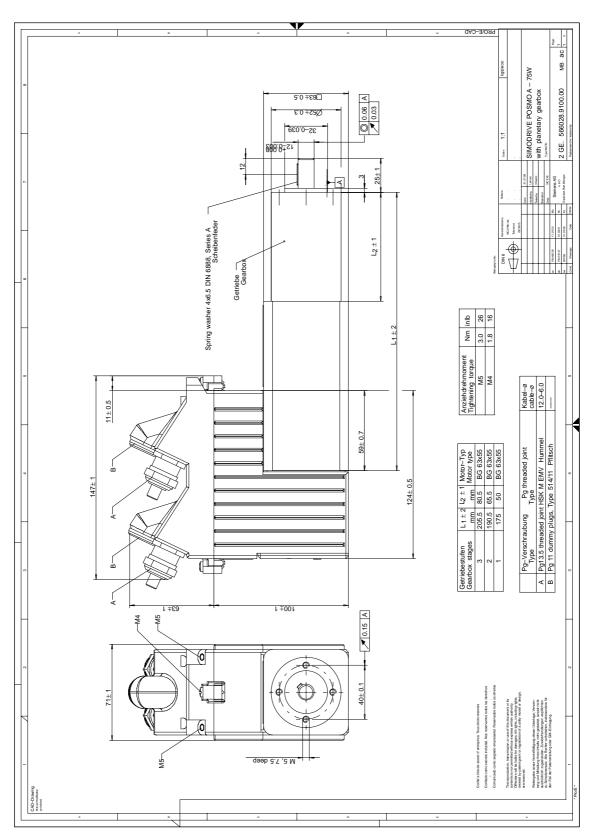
Dimension drawing: SIMODRIVE POSMO A – 75 W with planetary gearbox
